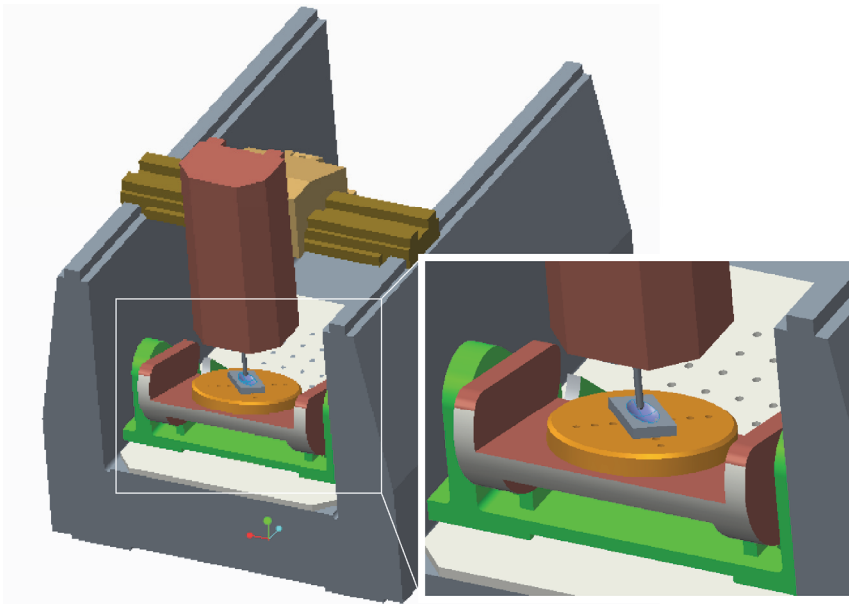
Machining simulation in the CAD/CAM system with machine play option
